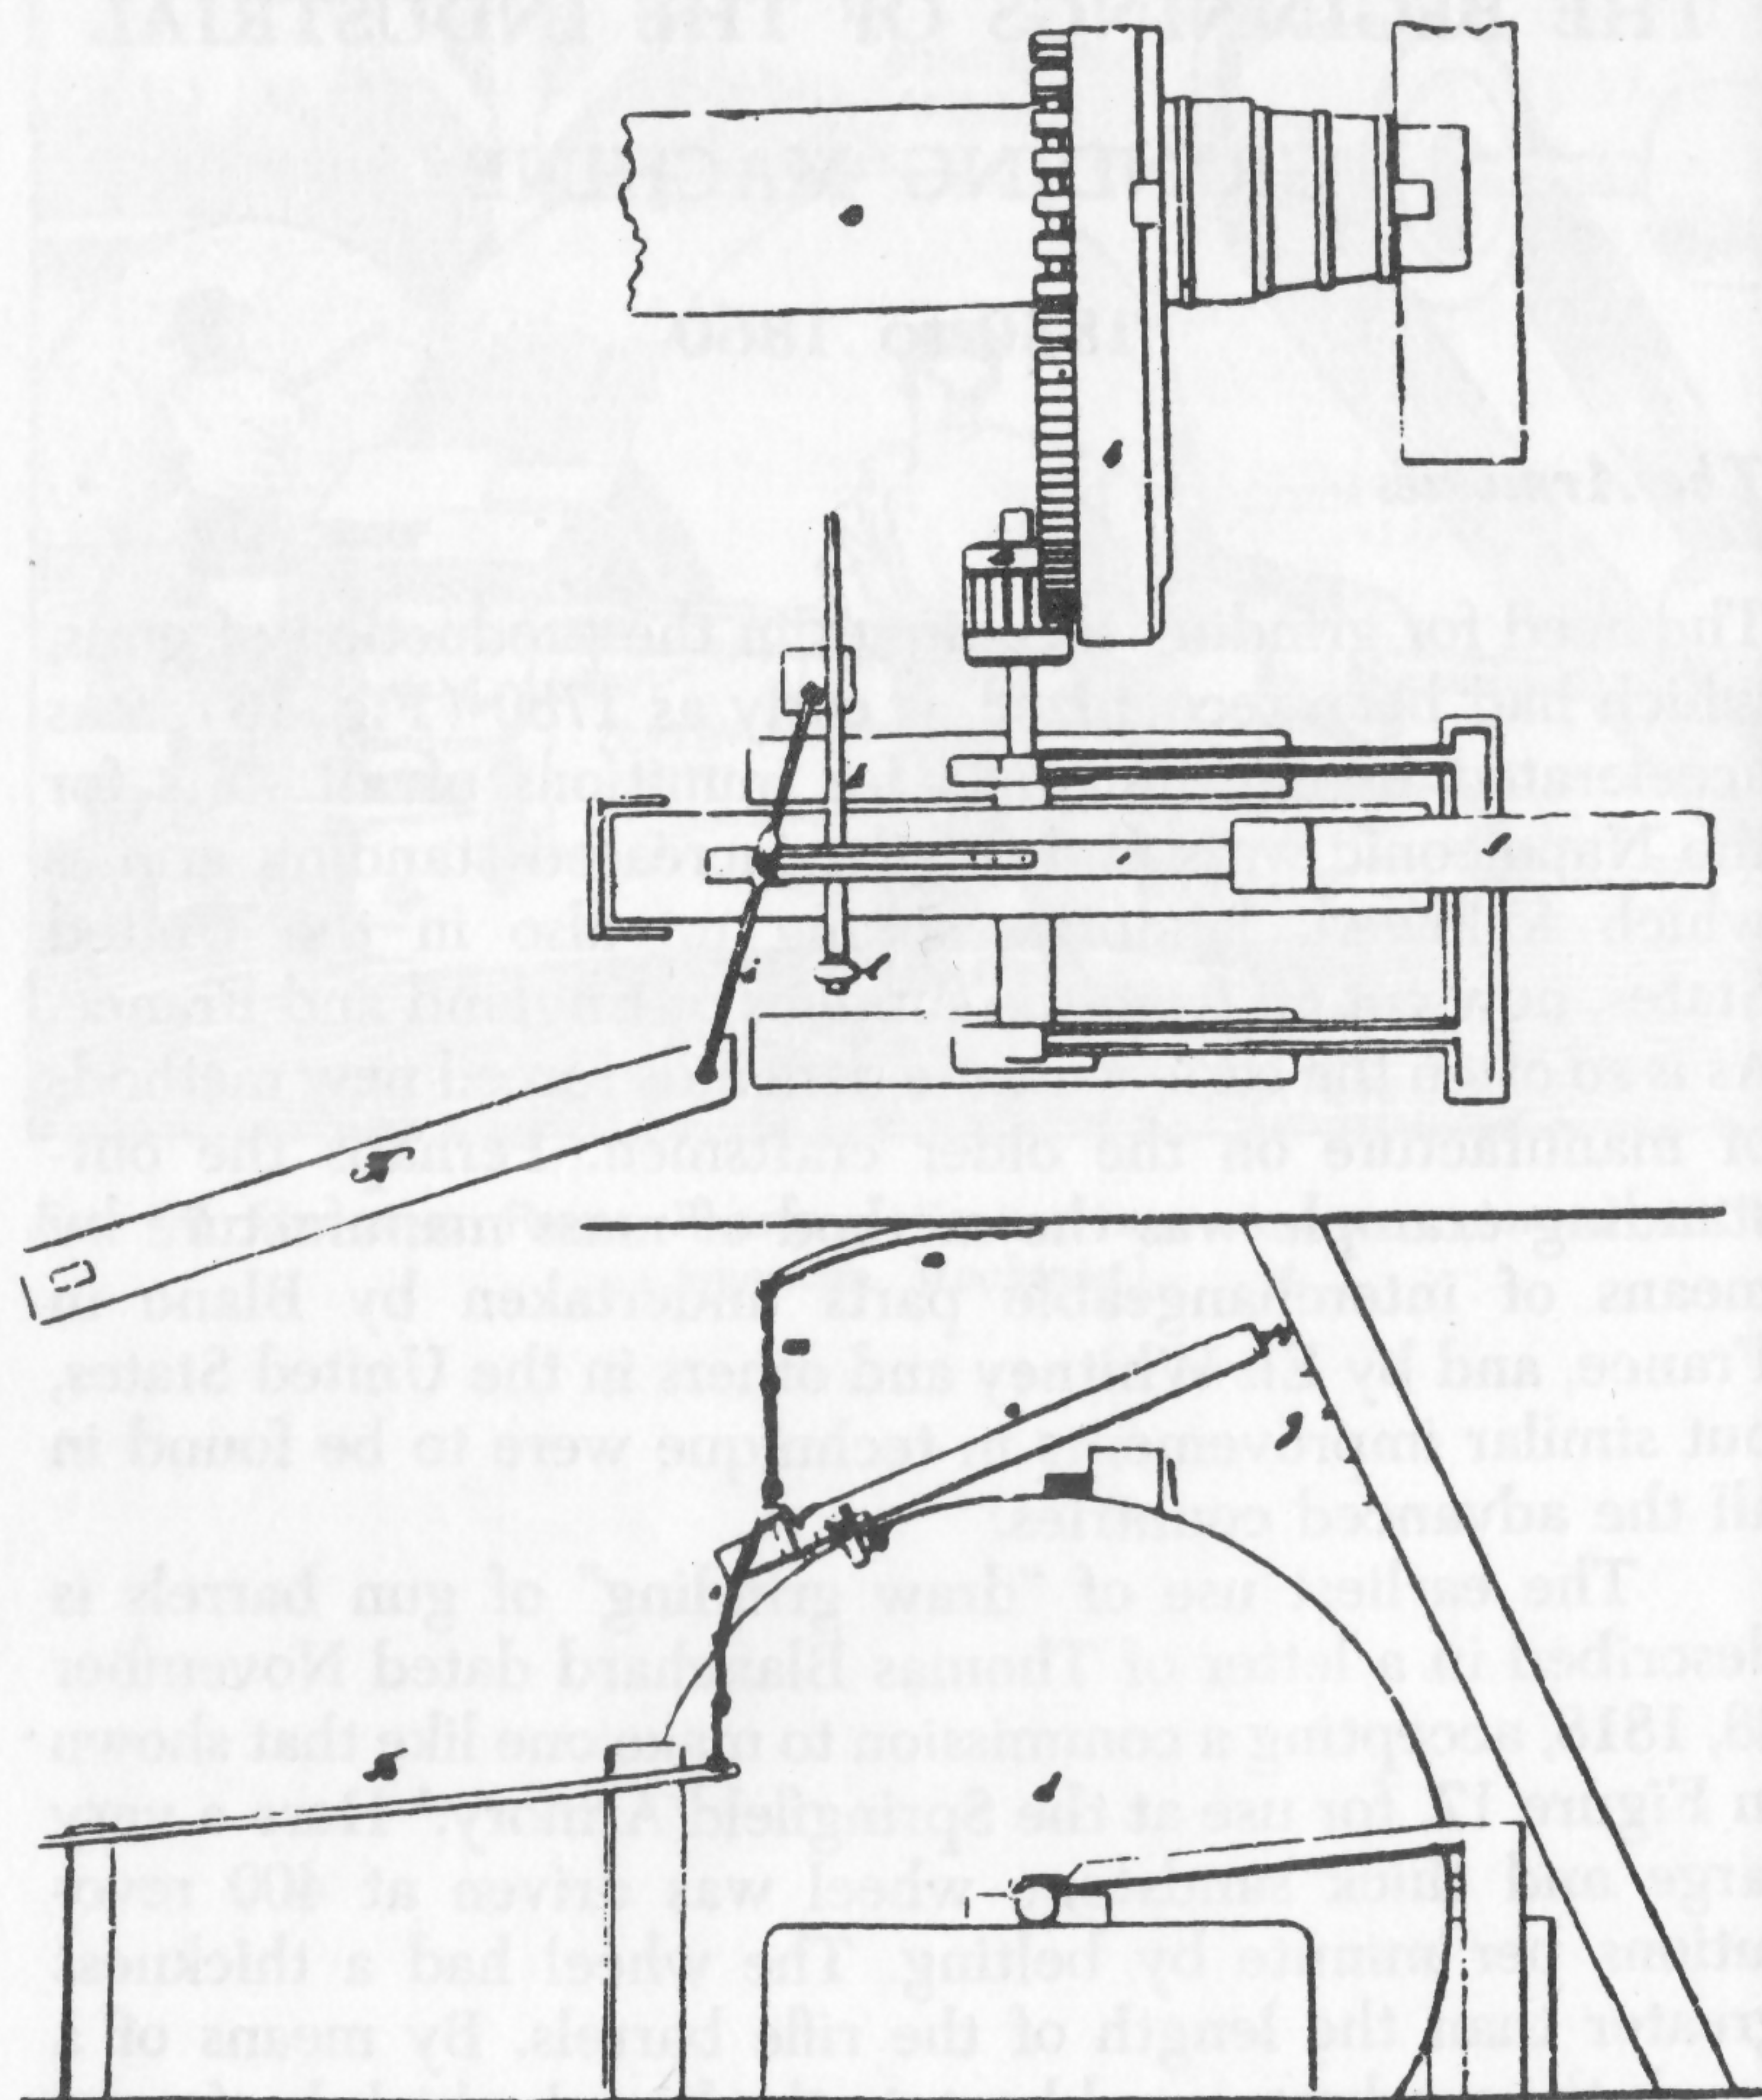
MACHINE FOR GRINDING ARMS, 1829 (Schroeder)
